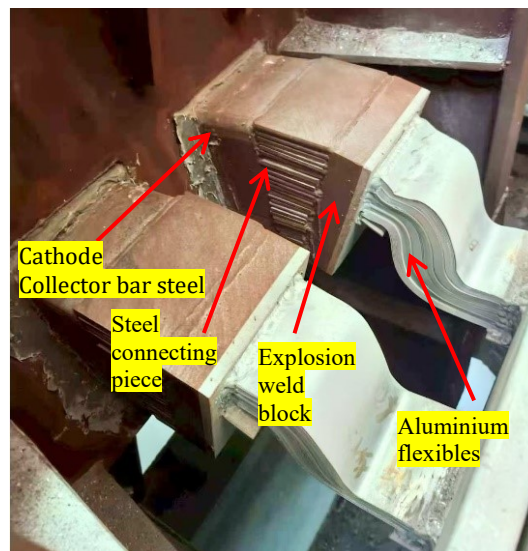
Traditional method—aluminium flexibles and cathode steel collector bar are connected by explosion weld block.
